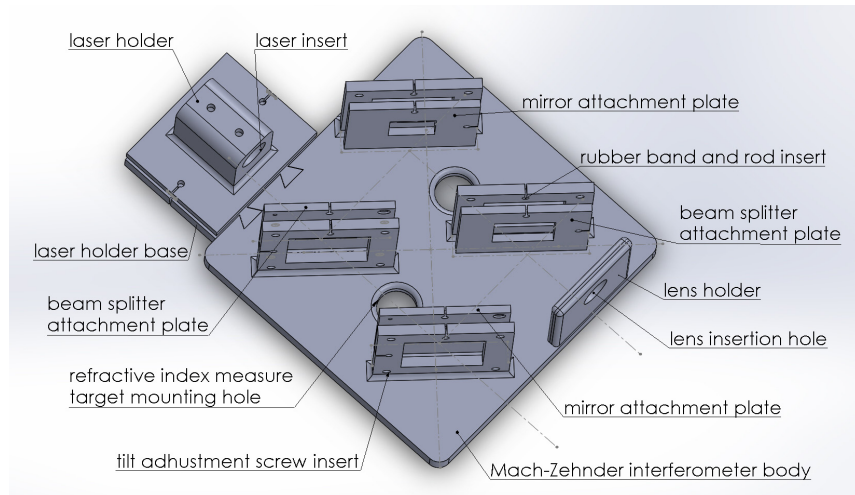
3D CAD image of the assembled Mach-Zehnder interferometer.
